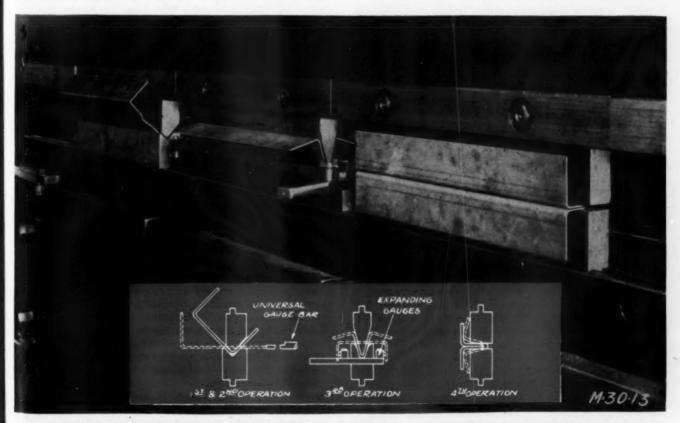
Progressive forming completes with one handling (one man or several) on one machine, operations which otherwise would require several brakes and handlings or several set-ups and handlings on the same brake. The text above explains the sequence followed in this set-up. (Cincinnati Shaper Co. photo.)
